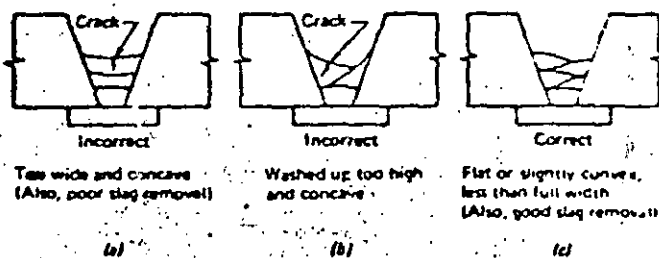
Wide, concave passes (a and b) in a multiple pass weld may crack. Slightly convex beads (c) are recommended.
